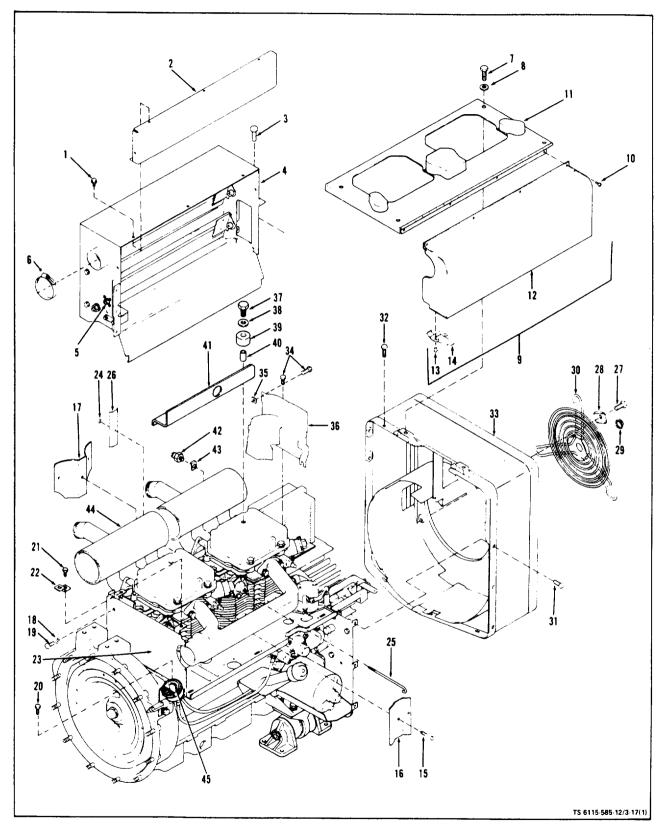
Engine Cooling Assembly (Sheet 1 of 2)
